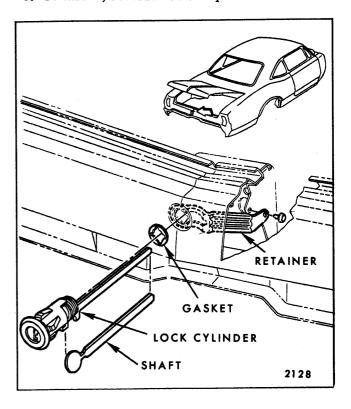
Rear Compartment Lid Lock Cylinder Assembly - Oldsmobile "B" Style Shown
